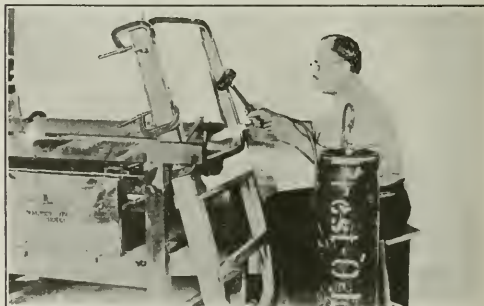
OPERATOR WELDING IN FRONT PANELS OF FRANKLIN COWL. NOTE METHOD OF HOLDING SHEET IN POSITION FOR THE WELD. THIS ALSO ILLUSTRATES THE COMPLETE OXY-ACETYLENE WELDING OUTFIT
